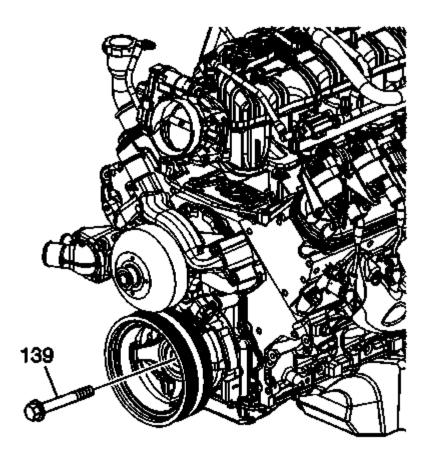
View Of Crankshaft Balancer Bolt Courtesy of GENERAL MOTORS COMPANY
